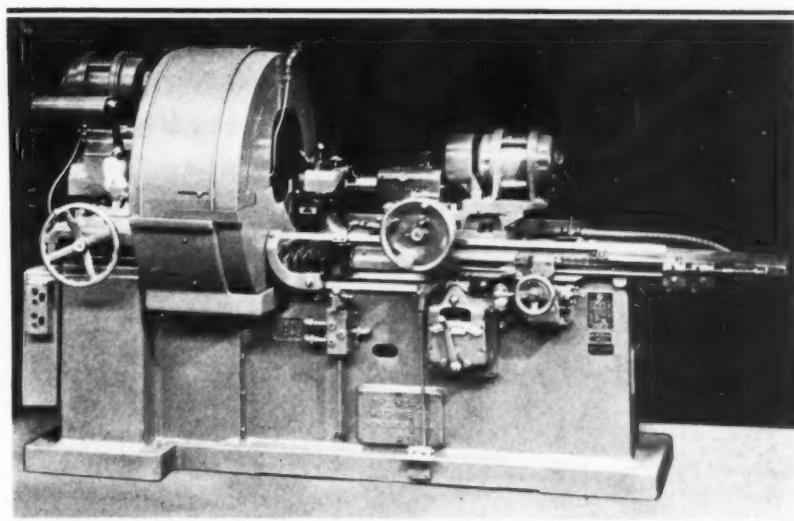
Heald Internal Grinder Designed for Handling Work up to 38 Inches in Diameter
